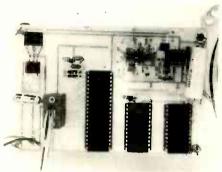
PROTOTYPE OF the speech synthesizer. DIP header at top of board is not used in version described here.
